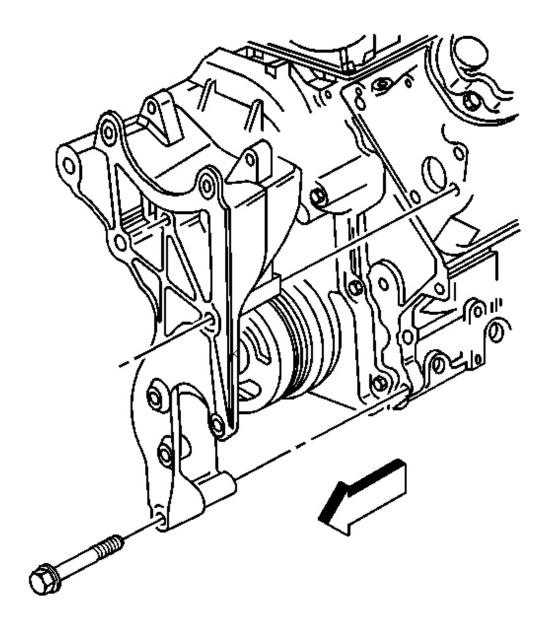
View Of Generator Bracket & Bolts Courtesy of GENERAL MOTORS CORP.
